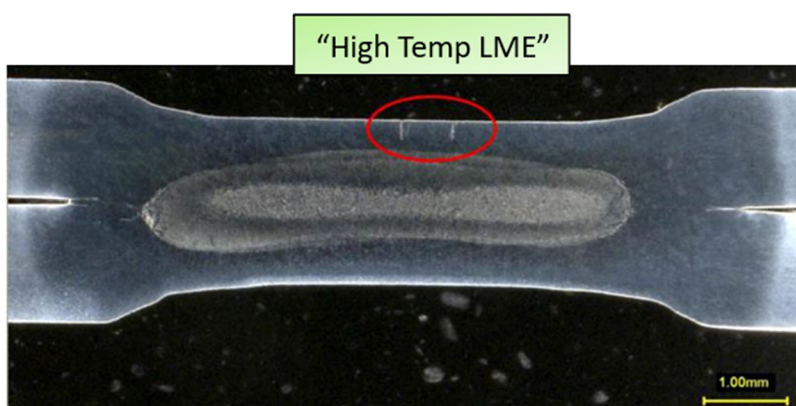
A weld cross-section etched to reveal examples LME cracks, judged to be High Temperature LME due to their location, touching the electrode face.
